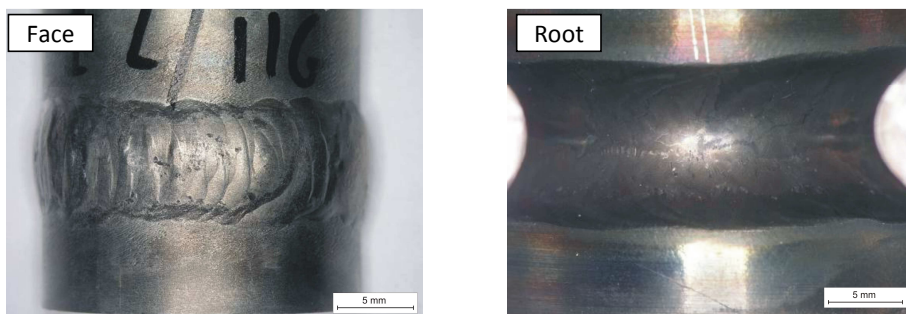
Face and root of a fusion weld made with a combined method: remelting - disc laser and filling and face - TIG method, of a tube made of DMV 617 mod alloy
